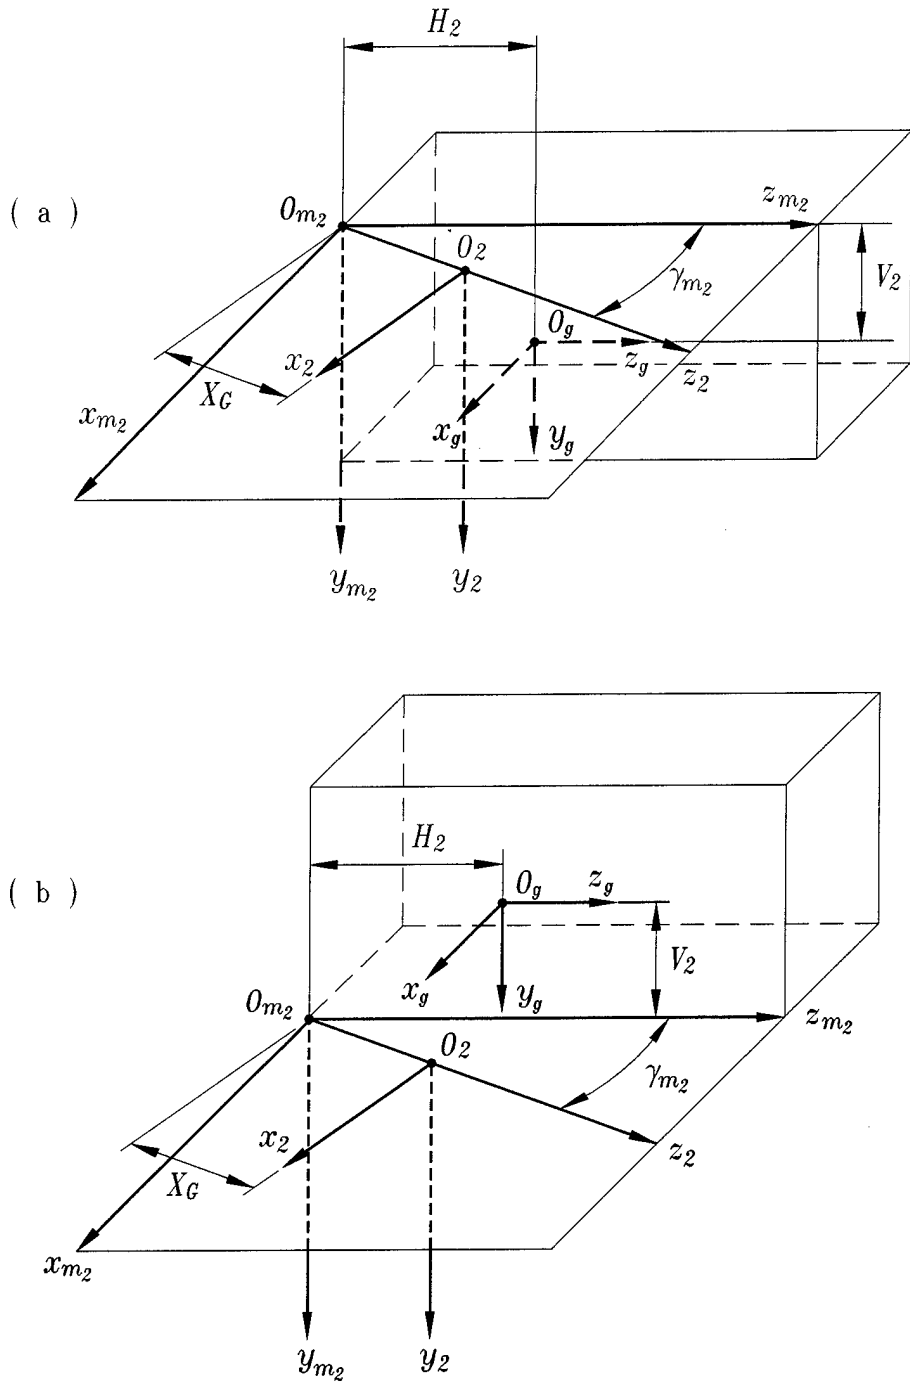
Machine tool settings for gear generation. (a) For left hand gear. (b) For right hand gear.
